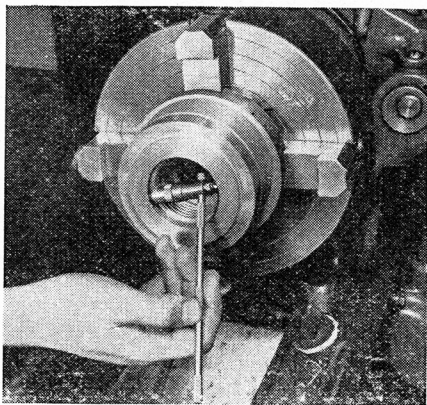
Using an internal micrometer caliper for measuring the diameter of a hole.
